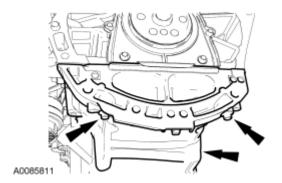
Identifying Rear Oil Pan Bolts Courtesy of FORD MOTOR CO.
